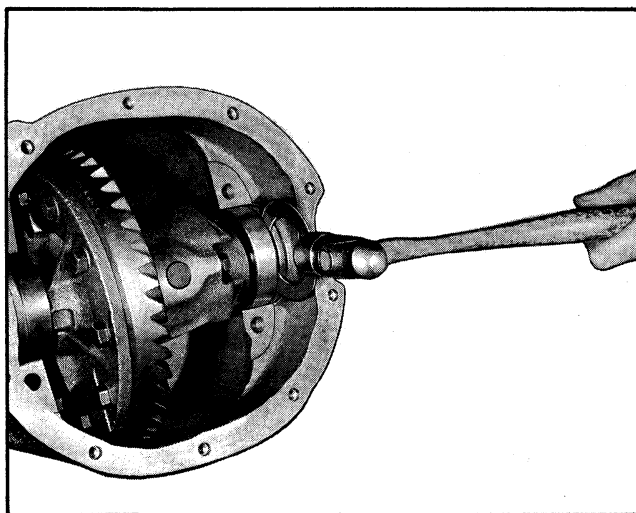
Installing Differential Side Bearing Adjusting Shims
